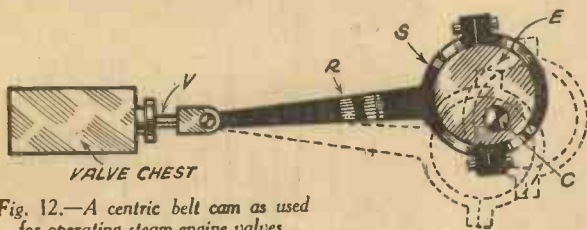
A centric belt cam as used for operating steam engine valves.
